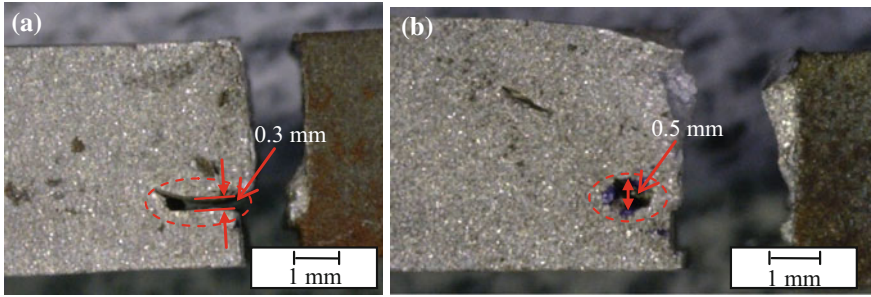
Tensile specimens a T5 and b T7 after failure
